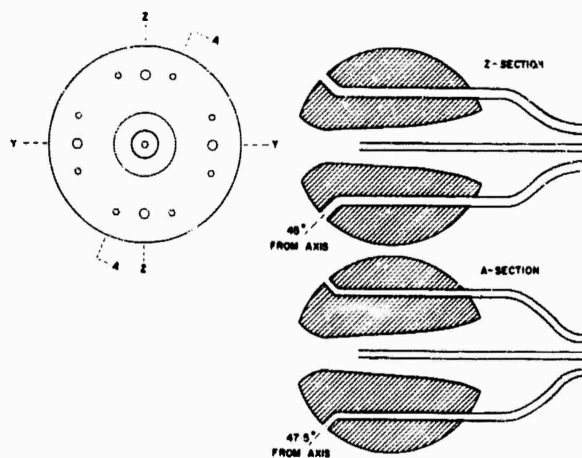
Front and cross-section views of anemoclinometer head, y- and z-coordinates shown on front view.
